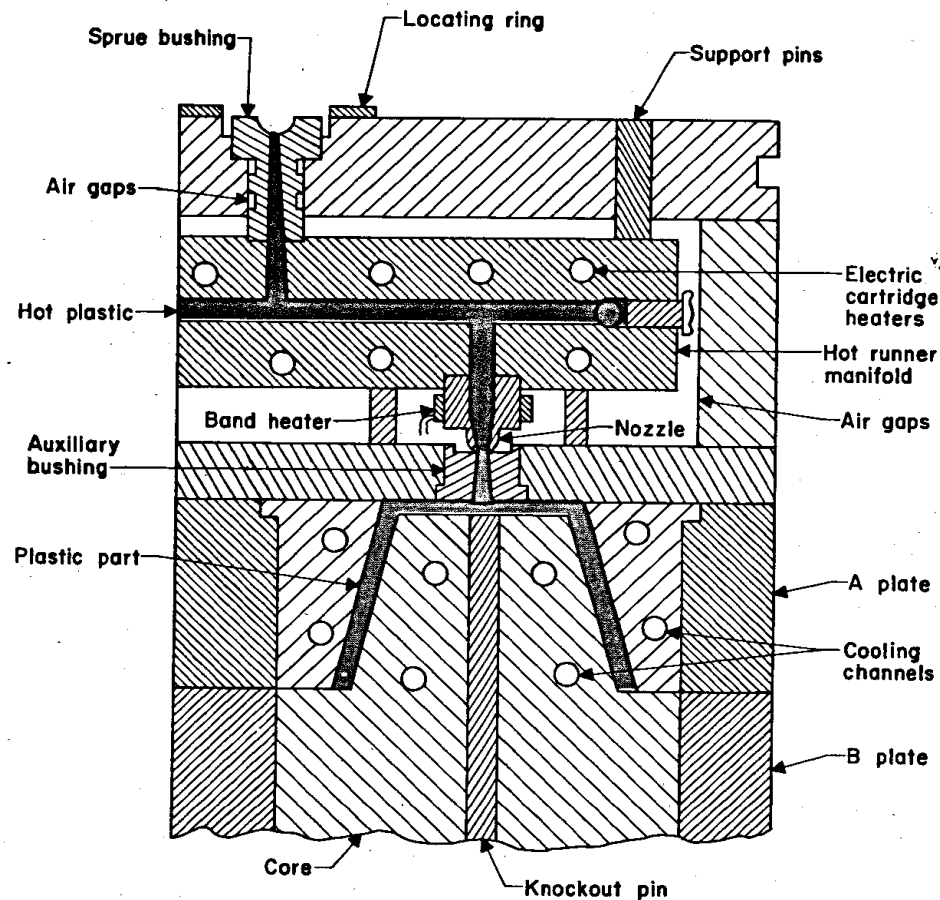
Schematic Drawing of an Early Design Hot Runner Mold (Robinson Plastics Corp.) [11]
